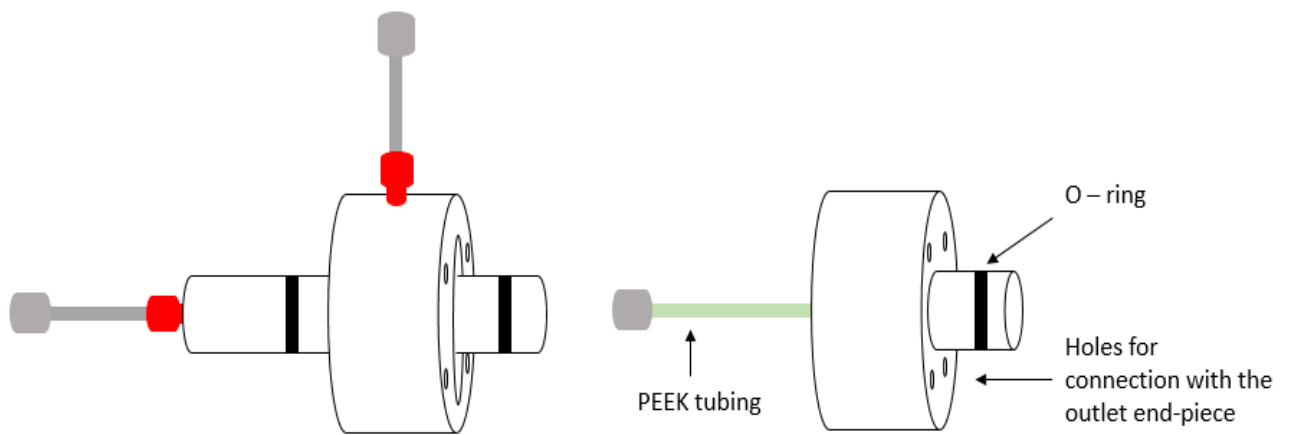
Inlet end piece consisting of two parts (left), outlet end piece (right).
